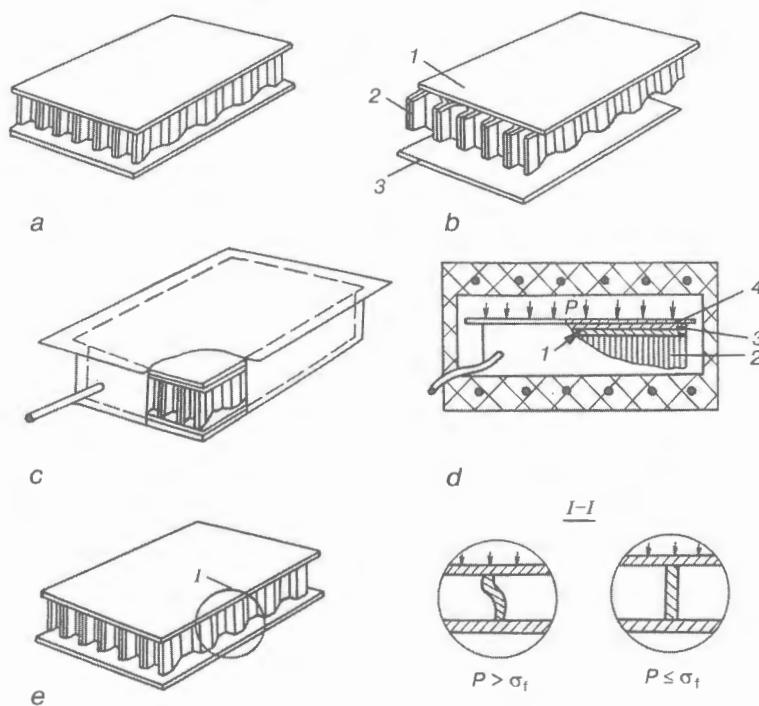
Process sequence of diffusion bonding with a low-intensity force action: *a* — required structure; *b* — blanks for welding; *c* — assembly; *d* — welding process; *e* — finished structure; 1 — load-carrying shell; 2 — honeycomb filler; 3 — process sheets; 4 — membrane (P — pressure; σ_f — loss of stability of the filler)
